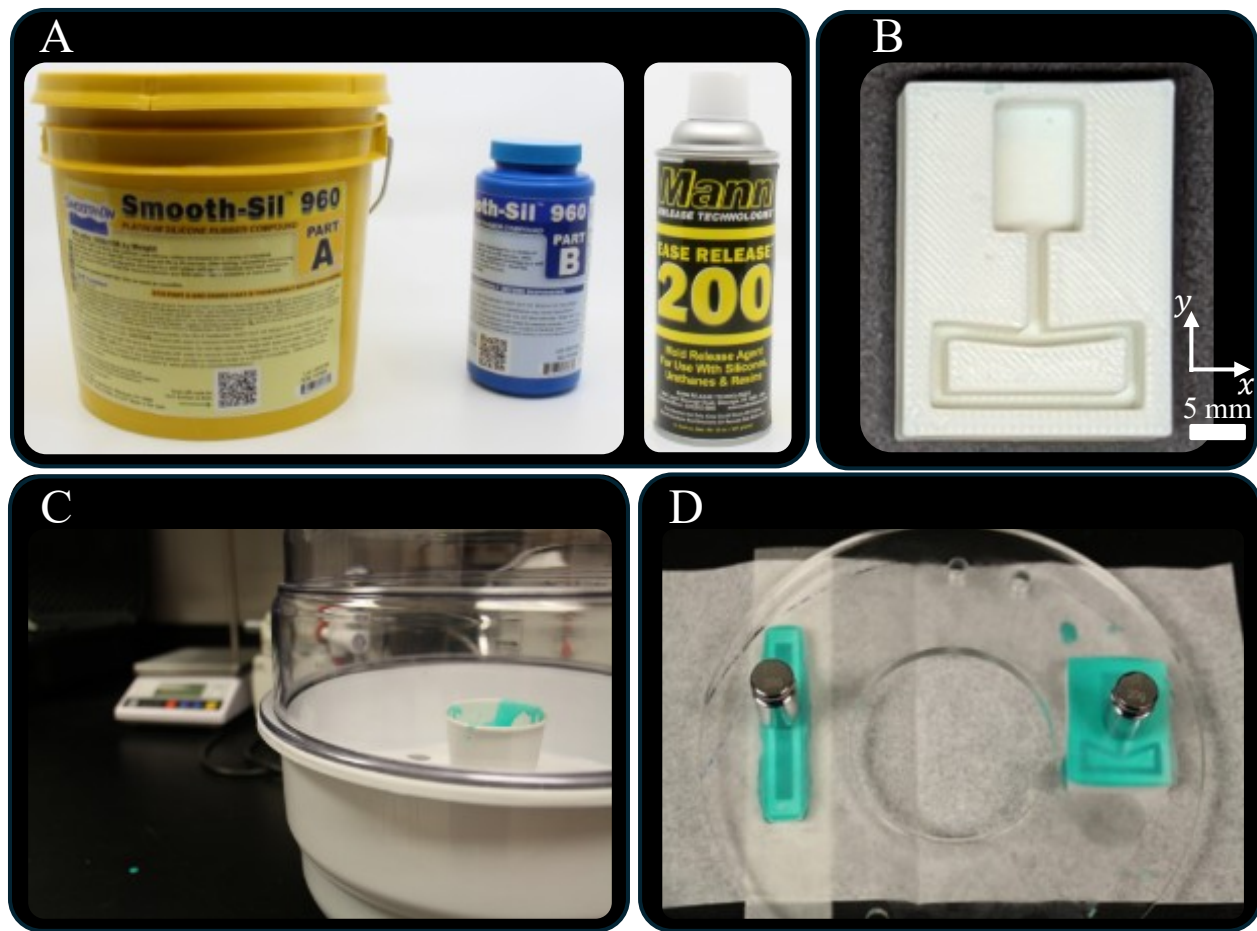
| Molding process. (A) The materials needed for the molding process are silicone rubber (Smooth-Sil 960, Smooth-On) and mold-release spray (Easy Release 200, Smooth-On) (B) The silicone is poured into a 3D-printed PLA negative mold replicating the unit cell geometry (C) A precision balance ensures the correct 100A:10B mixing ratio, and a vacuum chamber is used to degas the mixture (D) An acrylic plate with weights is placed on top of the mold during curing to ensure a flat, uniform surface
